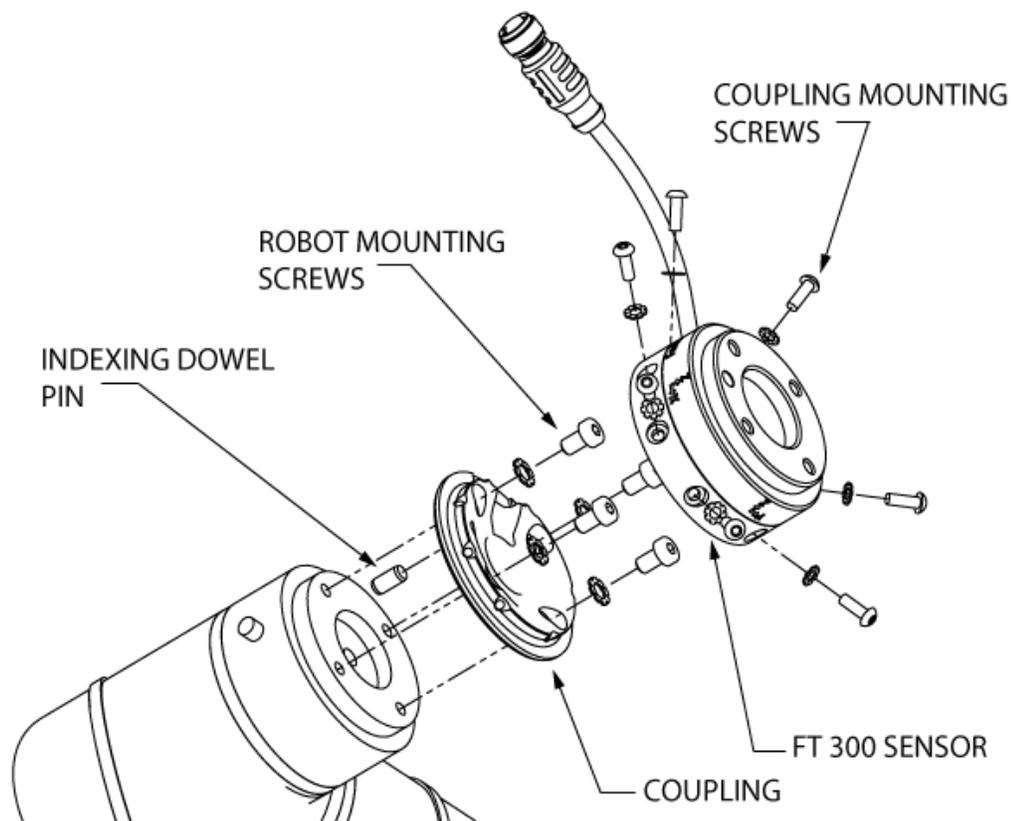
Attaching the FT 300 sensor to a robot arm using the mandatory coupling.
